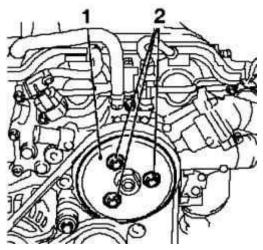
Removing the belt pulley pump coolant: 1 - pulley, 2 - bolts fixing
